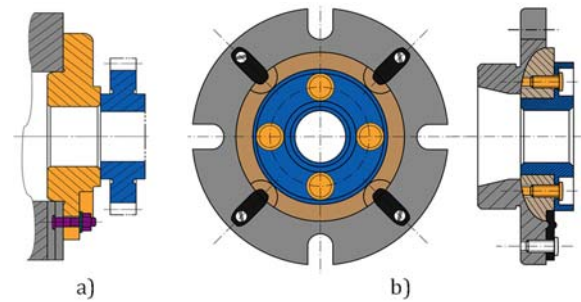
Examples of part holding systems for broaching: (a) simple location which requires a high degree of tool-workpiece accuracy; (b) concept for self-alignment [25, 89].
